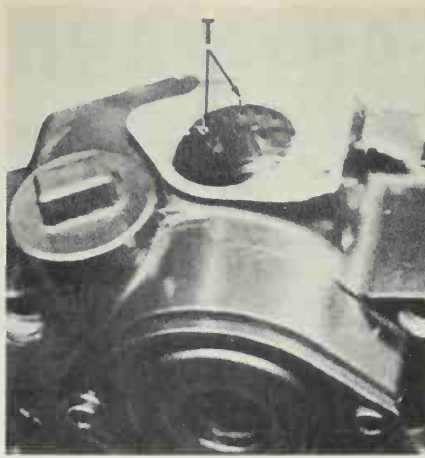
Position camshaft gear so timing marks (T) on gear and tappet housing opening are three teeth apart as shown. Refer to text.
